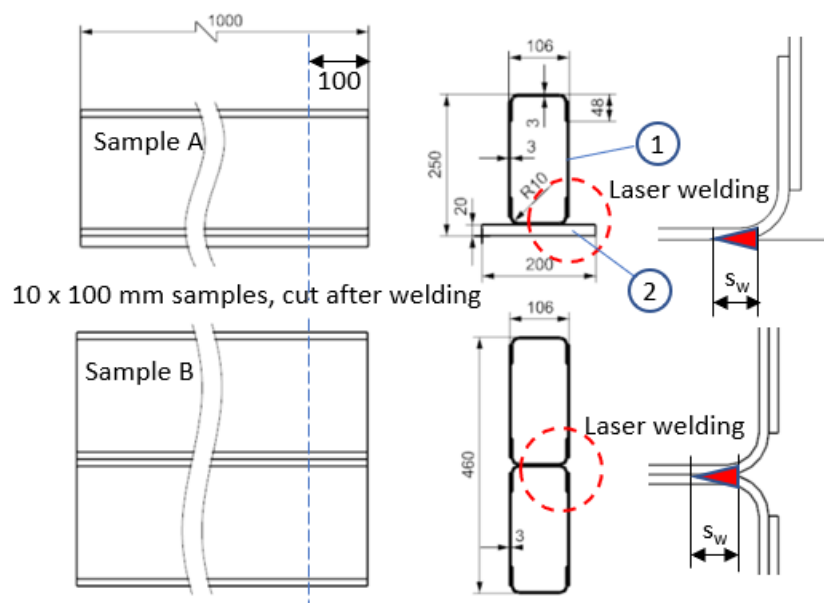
The shape and main dimensions of the test samples. a) laser weld joint between S355J2 rectangular profile and HS-steel profile and b) laser weld joint between two HS-steel hollow-profile. (red arrows show laser-weld seam positions; thickness of part 1 is 3 mm and part 2 is 20 mm; width of part 2 is 200 mm)
